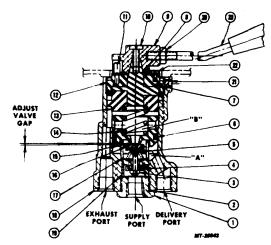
Sectional View of Midland Ross Hand Control Valve
